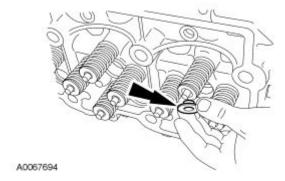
Installing Valve Spring Rotator Courtesy of FORD MOTOR CO.
